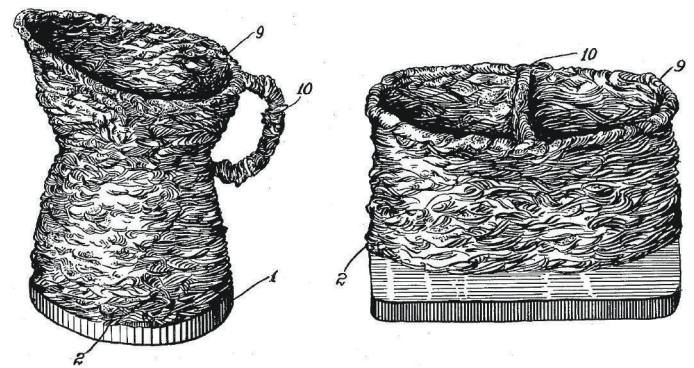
Several objects made by using weld deposition. Source: Ref 15
